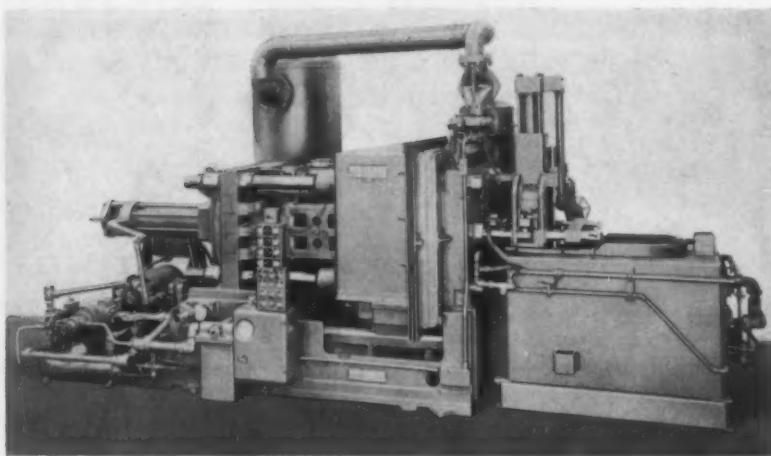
Hood around dies on 400-ton hot chamber machine is both vacuum chamber and safety shield to block leaking metal sprays.
